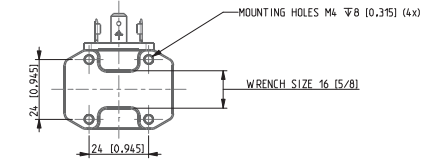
Dimensions 1/4" Inline, Coil Width 32mm
